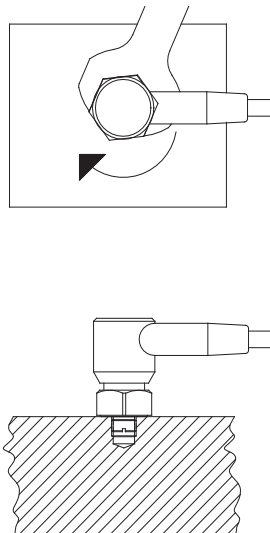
Mounting hole is prepared into machine surface to accept sensor's mounting stud.
